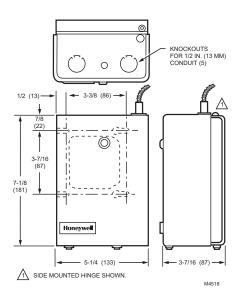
R8182H,J installation dimensions in inches (millimeters).
